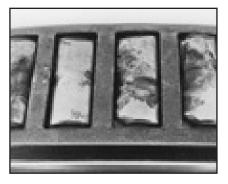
A heavily overloaded tapered roller bearing resulted in premature, severe fatigue spalling on the rollers. The load was so heavy that large pieces of metal broke off the rollers.
